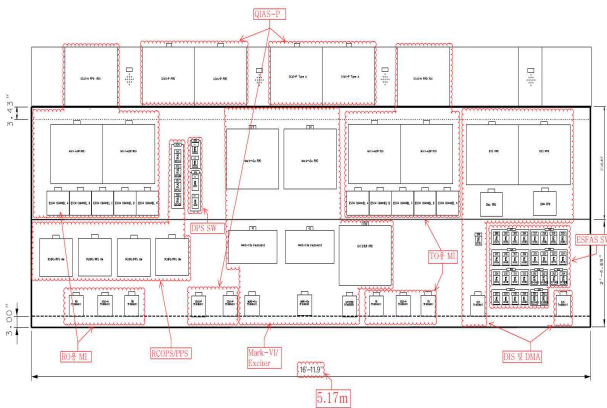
HSI Arrangement Drawing of Safety Console for APR+ Optimized and Detailed Design
